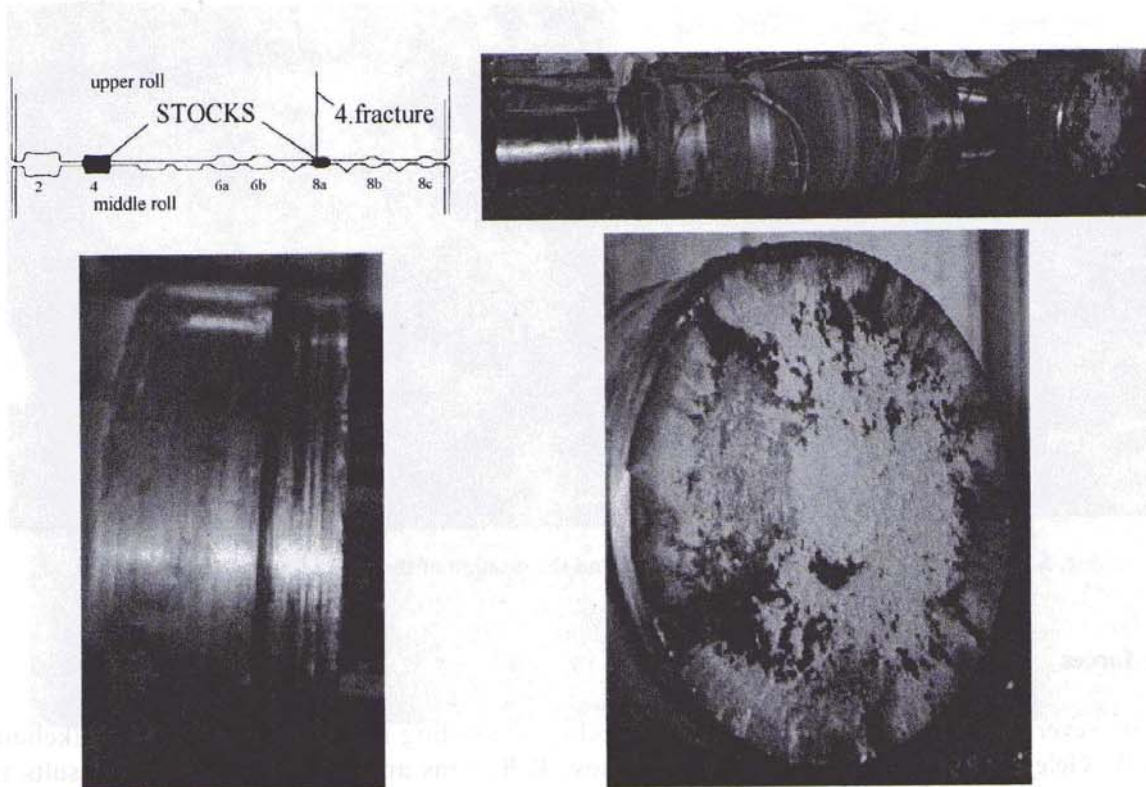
Fracture surfaces of the fourth broken roll and the position of the stocks in time of the fracture.
